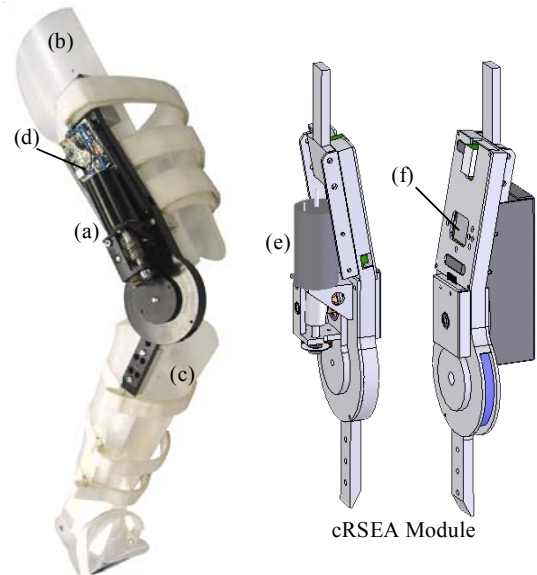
Compact series elastic actuator designed for assisting the knee joint. It consists of (a) the proposed cRSEA module, (b) a thigh brace, (c) a calf brace, (d) a motor driver, (e) a DC motor, and (f) an embedded controller.
